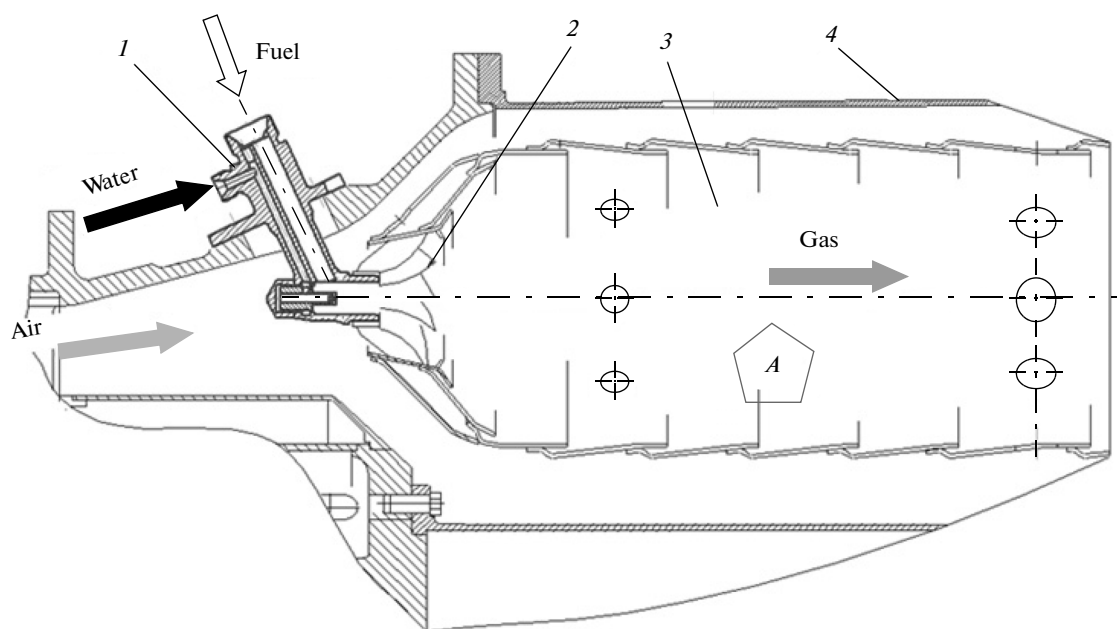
DTs-59 engine combustion chamber with water admission into the burning zone through the fuel nozzle. (1) Water–fuel nozzle, (2) flame tube front device swirler with an angle stabilizer, (3) combustion chamber flame tube, (4) combustion chamber sealed casing.
